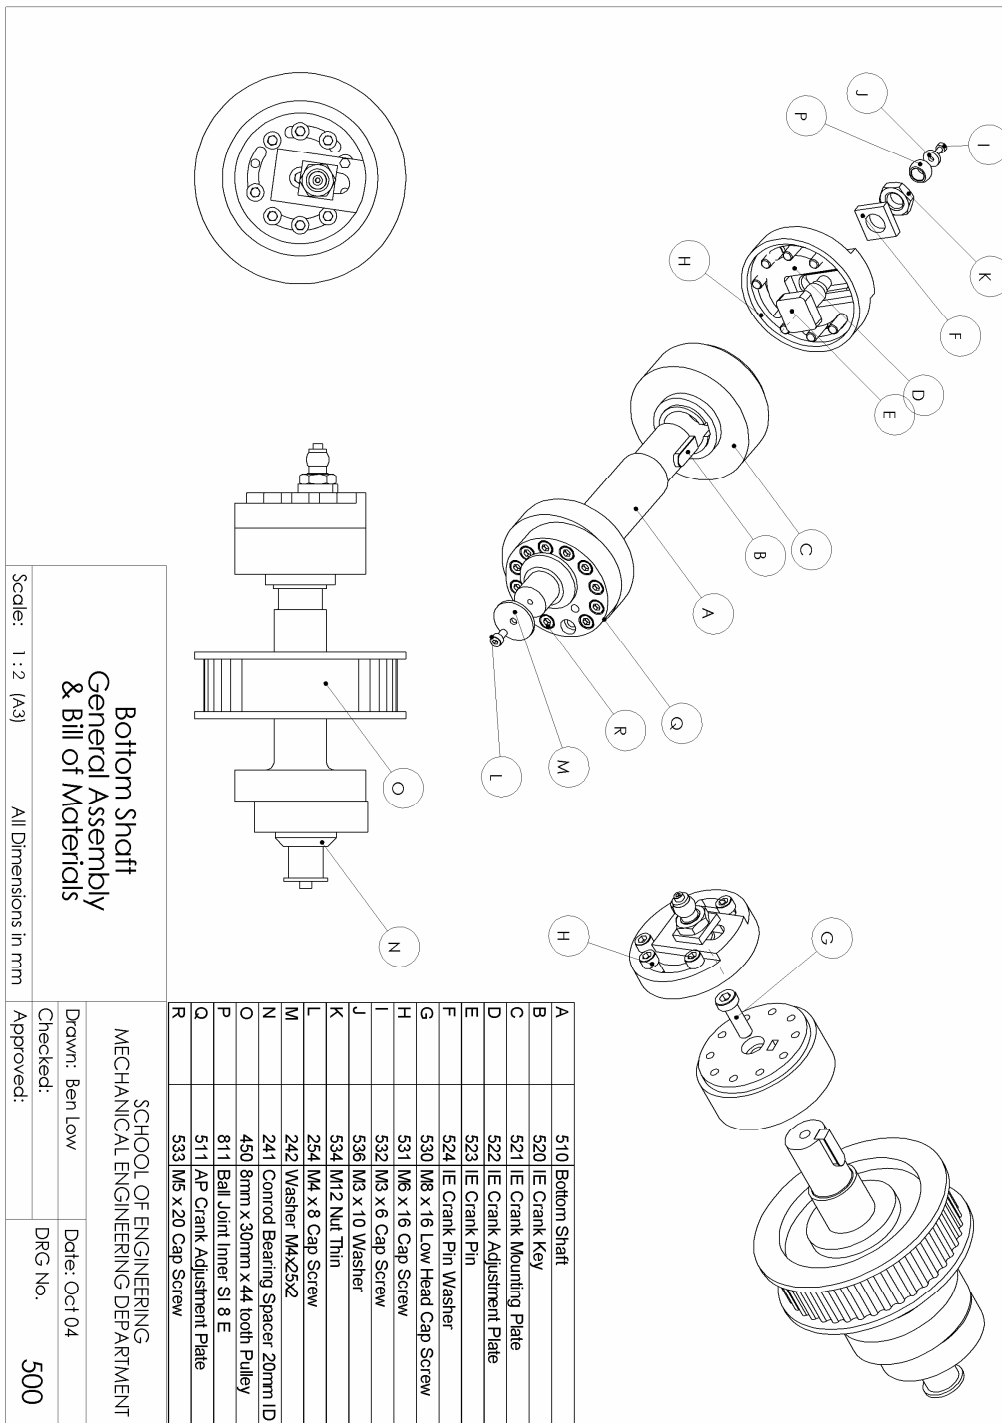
Manufacturing sub-assembly drawing 500: Bottom shaft general assembly and bill of materials
